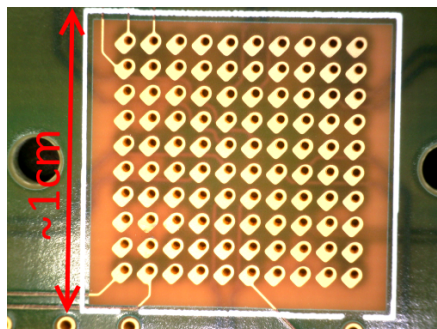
Contact pins on top board for interposer compression springs. The connecting vias could be placed within the pads without being filled since the pads are not soldered.
